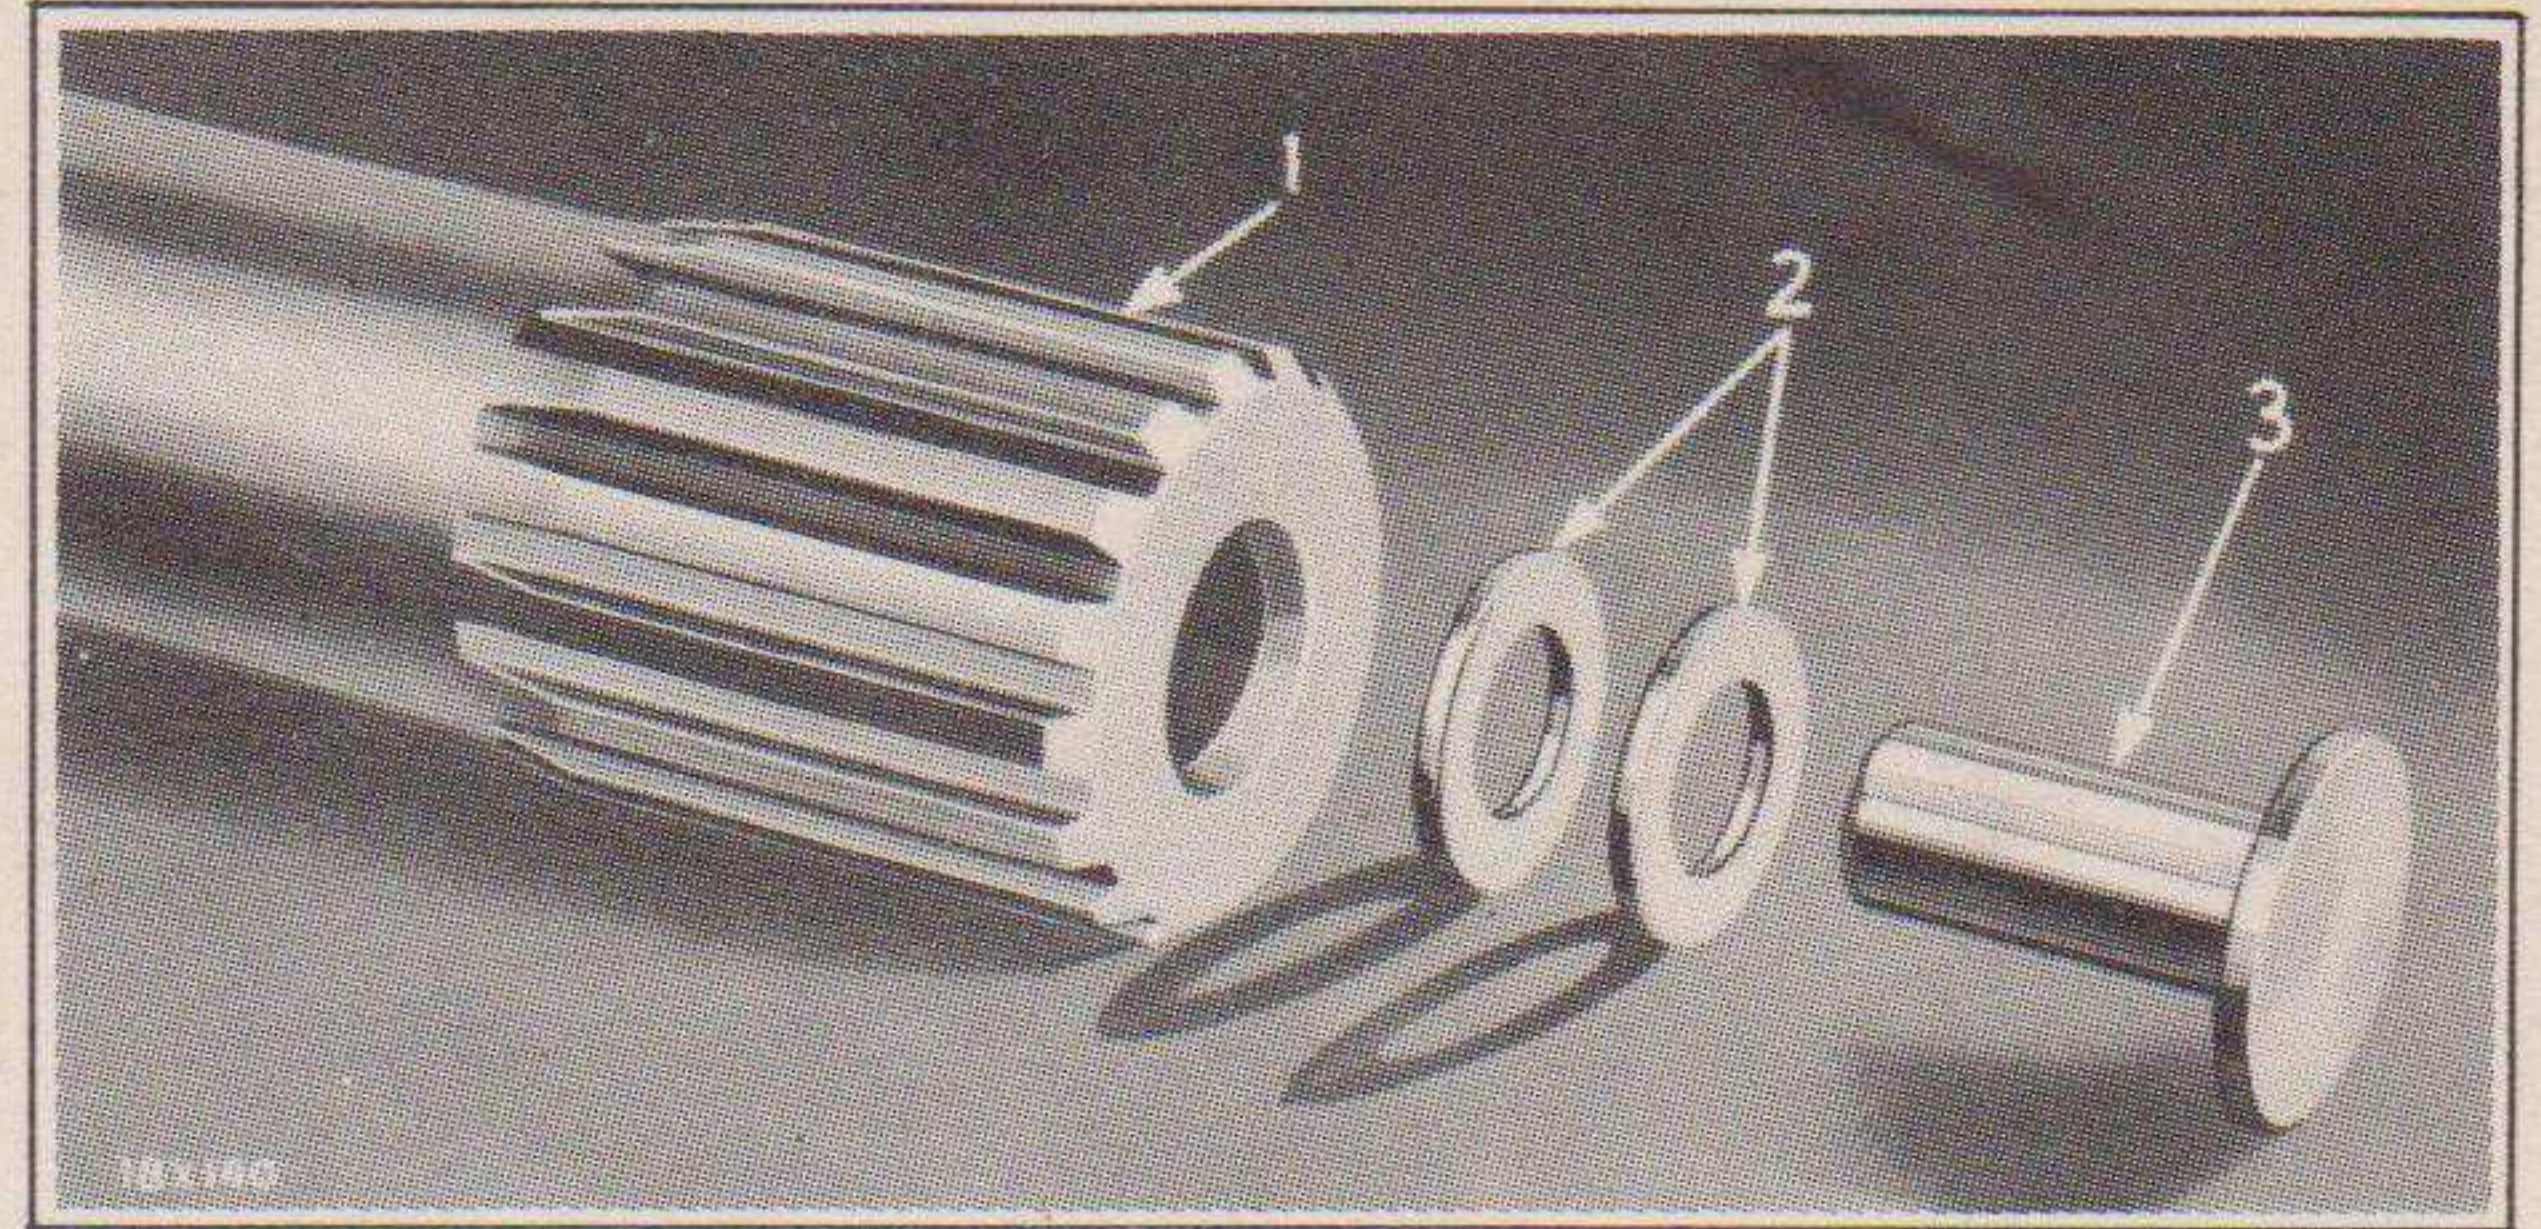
Universal Drive Shaft Thrust Button (Bendix-Weiss)
